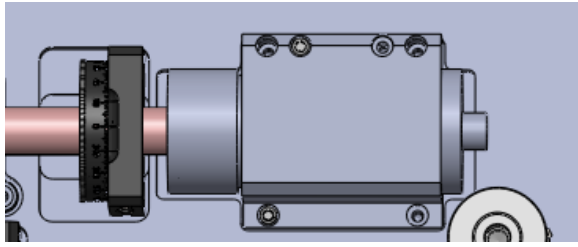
CAD drawing of fiber launch and half-waveplate mount. It was necessary to insert a polarizer between these two elements.
